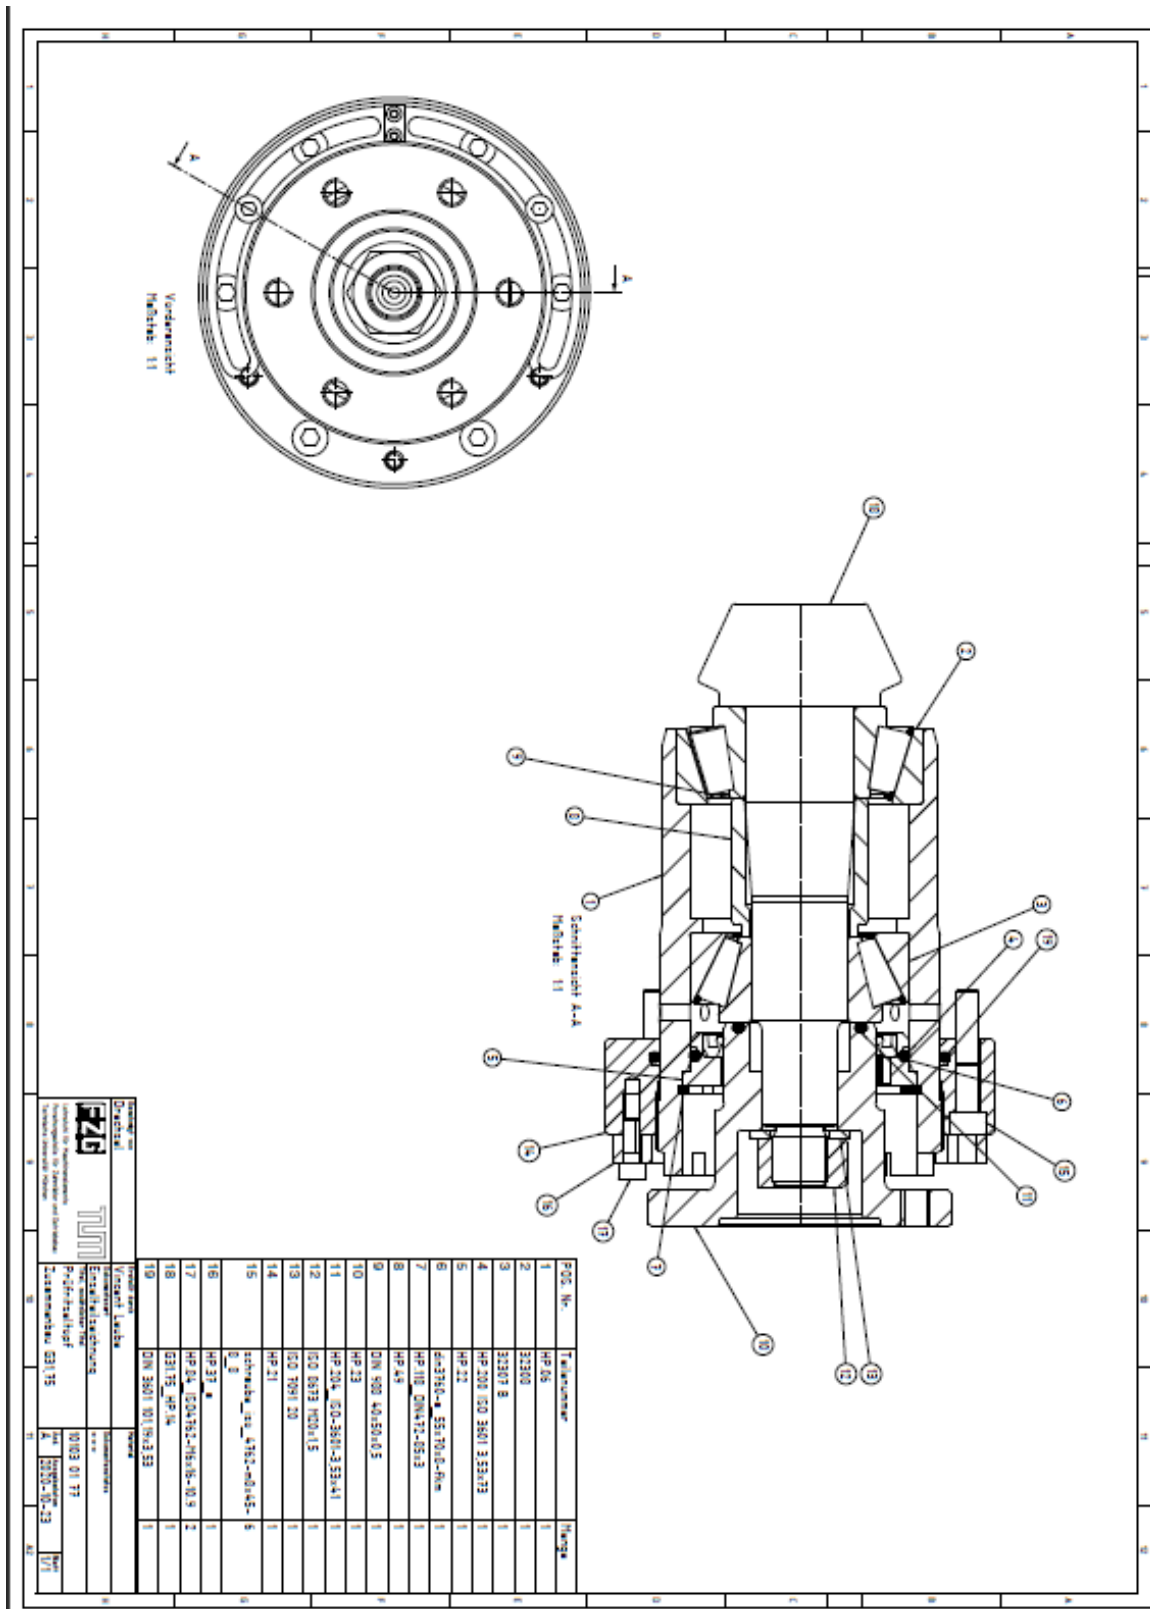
G31.75 Test Pinion Pot 2D CAD
